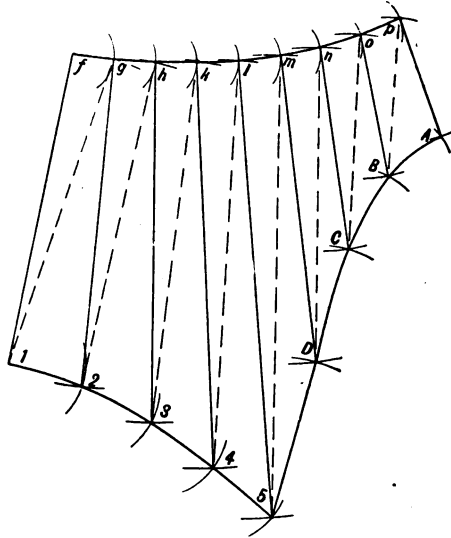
Semi-Pattern for the Branch, the Plan and Elevation of Which is Shown at Fig. 120.
